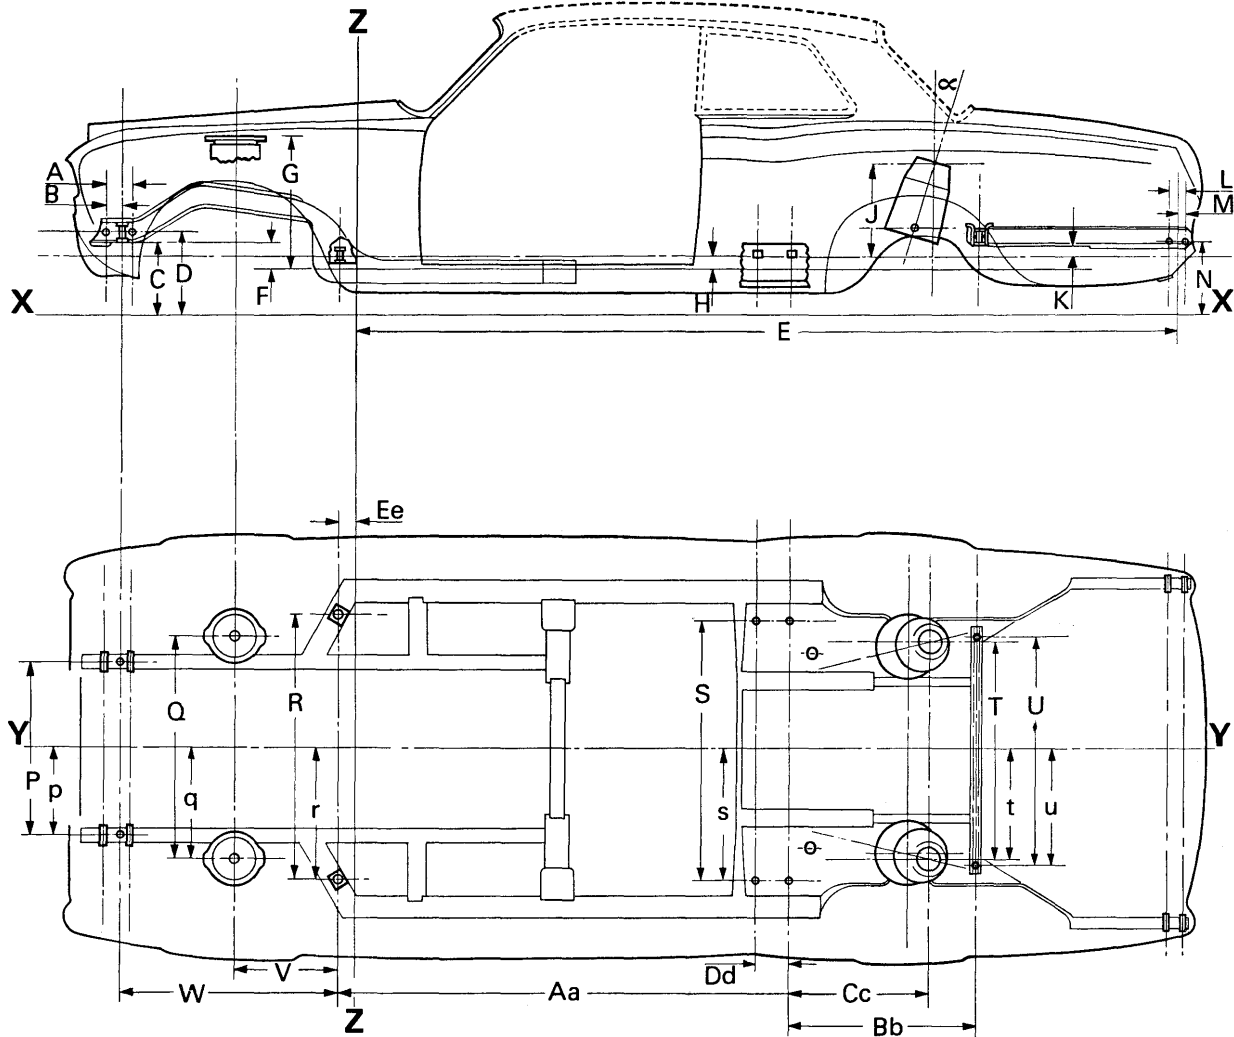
BODY MOUNTING POINT DIMENSIONS
